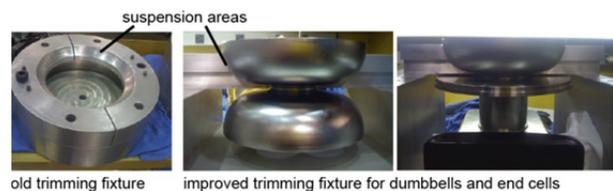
Old (left) and improved fixture (middle, right) for cell equator machining.
